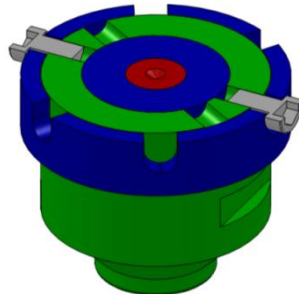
Cross section view of tool assembly with pin adjustment system.
